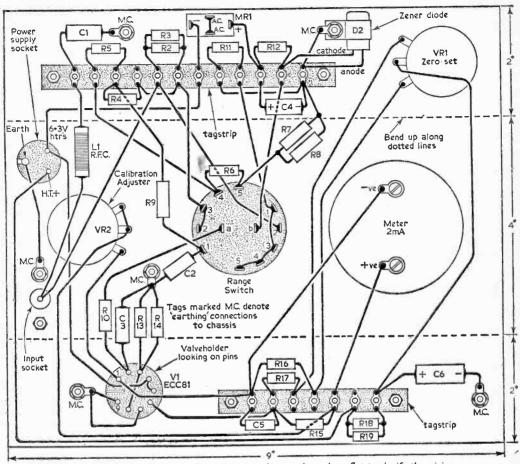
The complete wiring diagram—the sides are shown bent flat to clarify the wiring.
